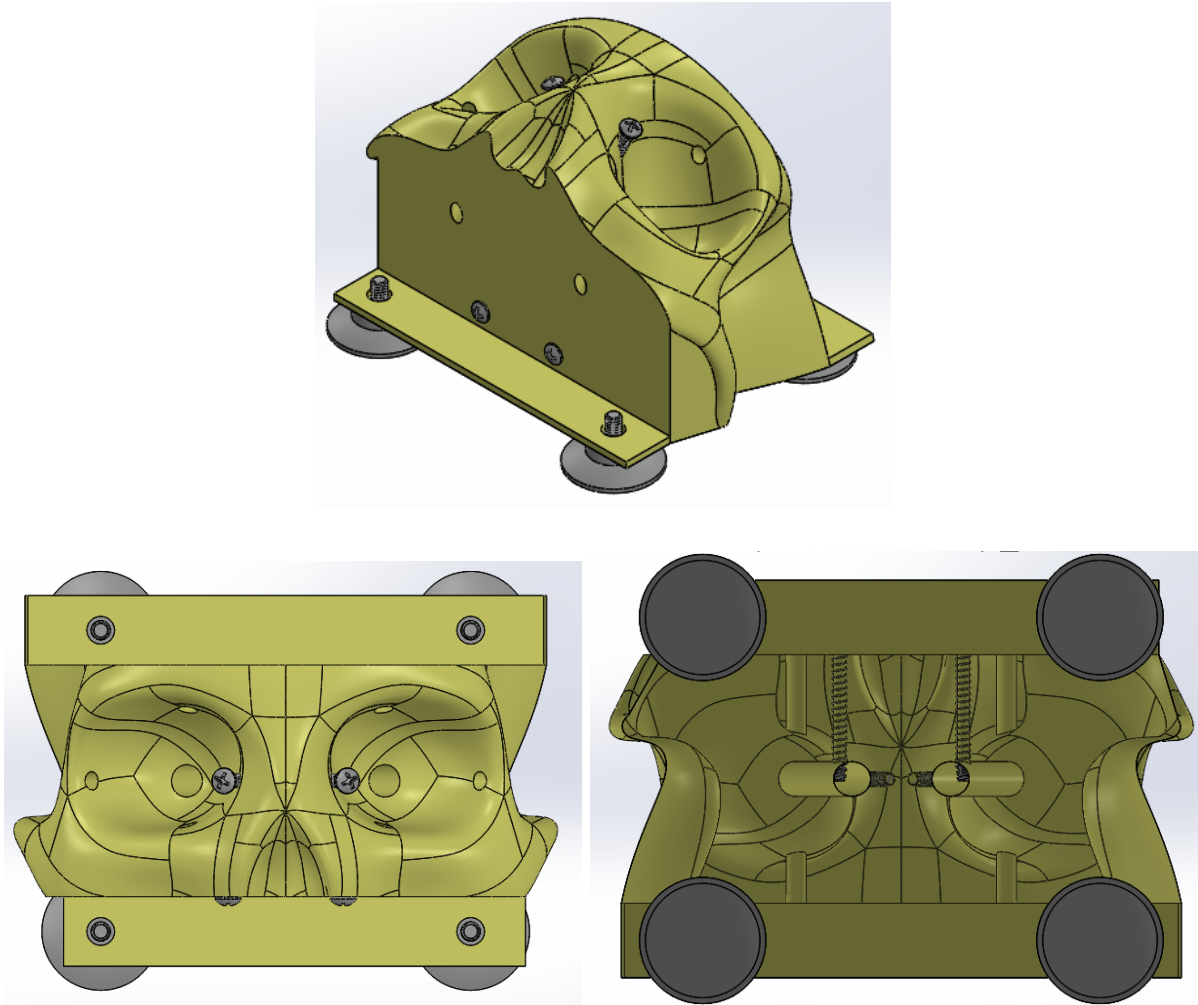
Perspective view of the mold used for injection molding of the silicone rubber.
